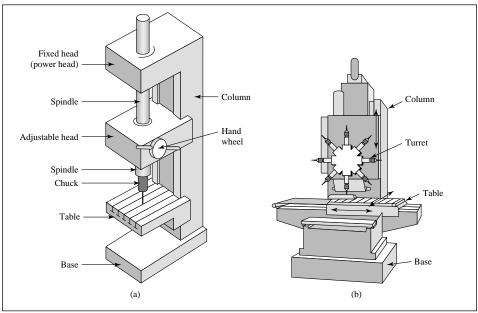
Schematic illustration of (a) vertical drill press, (b) CNC turret drilling machine.
